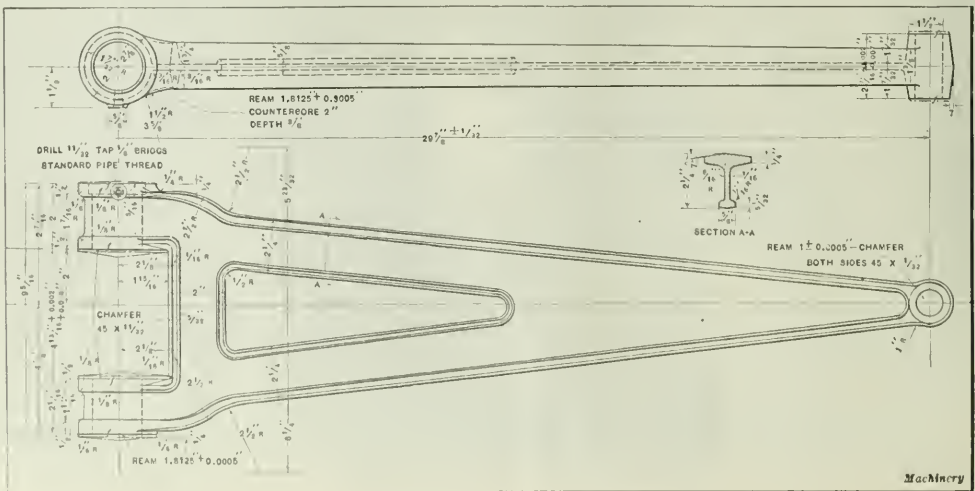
Rear Axle Torque Arm drop-forged in the Dies shown in Fig. 8
